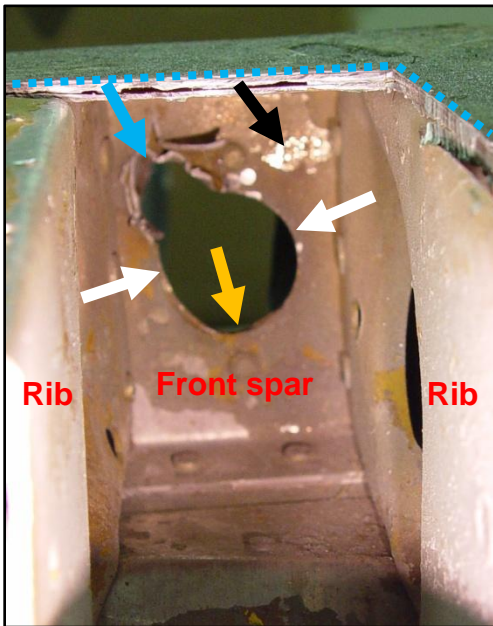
The trim tab rod hole in the elevator front spar, looking forward.
